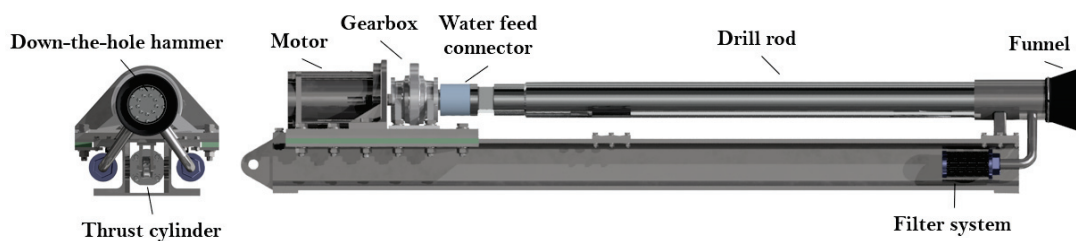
Water-hydraulic rotary-percussive rock drill - Parts
